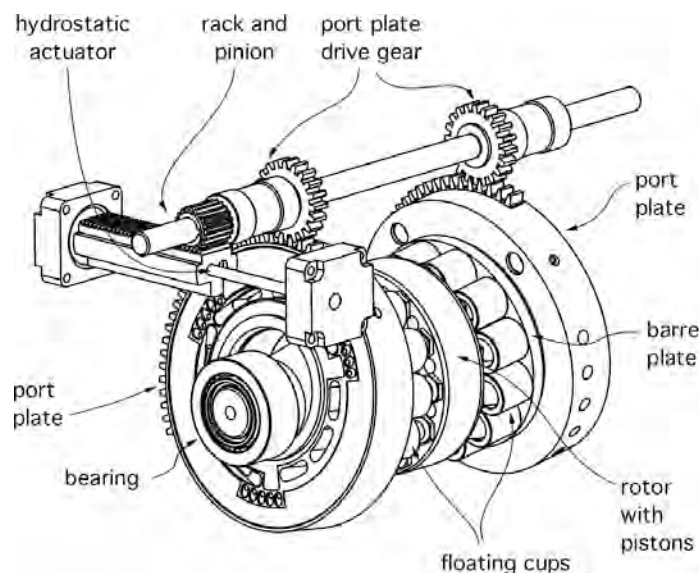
Floating cup hydraulic transformer with rotating port plates.
